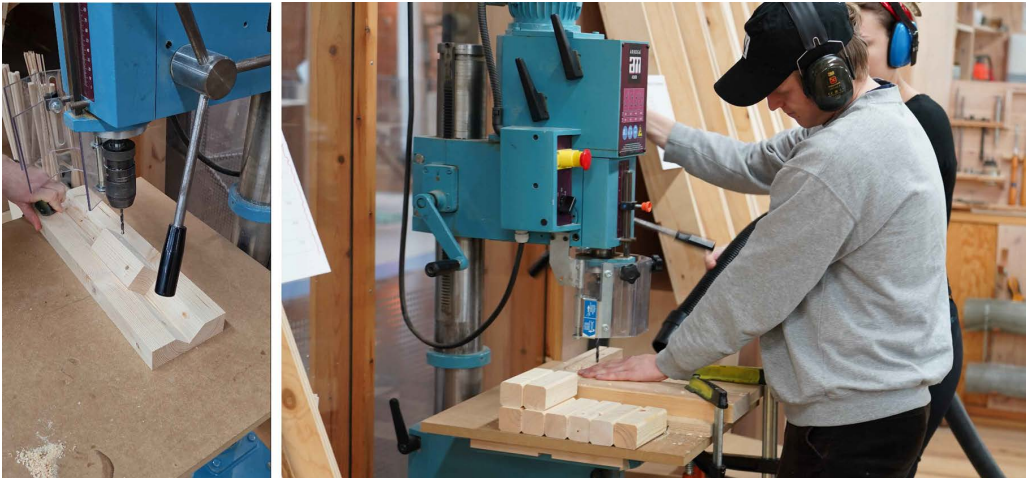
Left, the jig used to drill the holes for the bracing. Right, a different jig to drill the holes for bolts connecting the laths.
